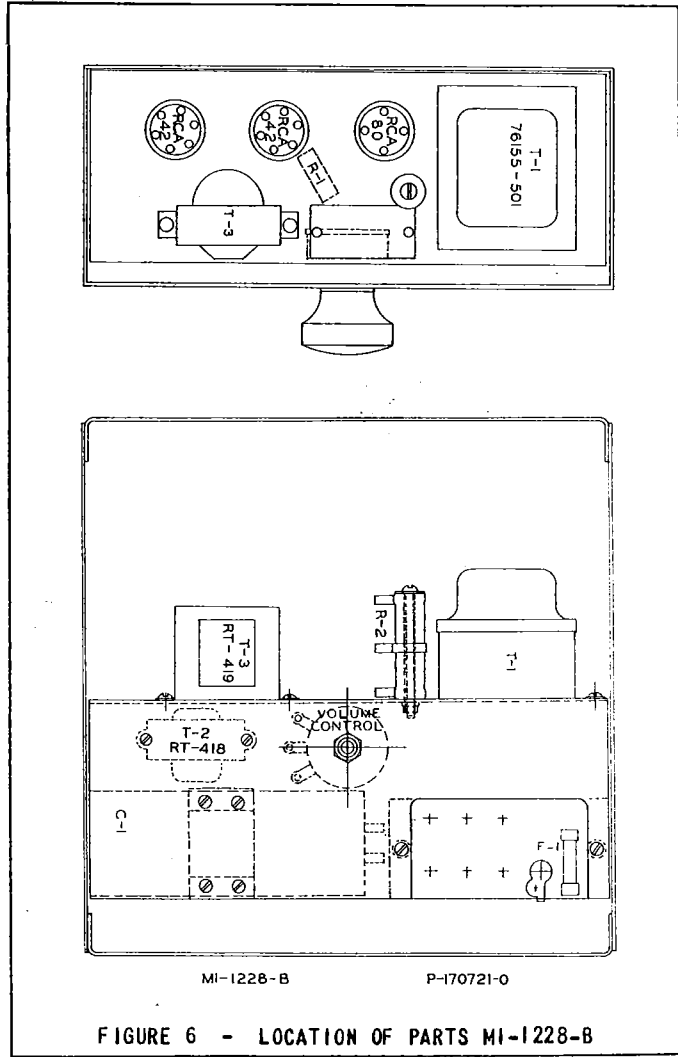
LOCATION OF PARTS MI-1228-B
